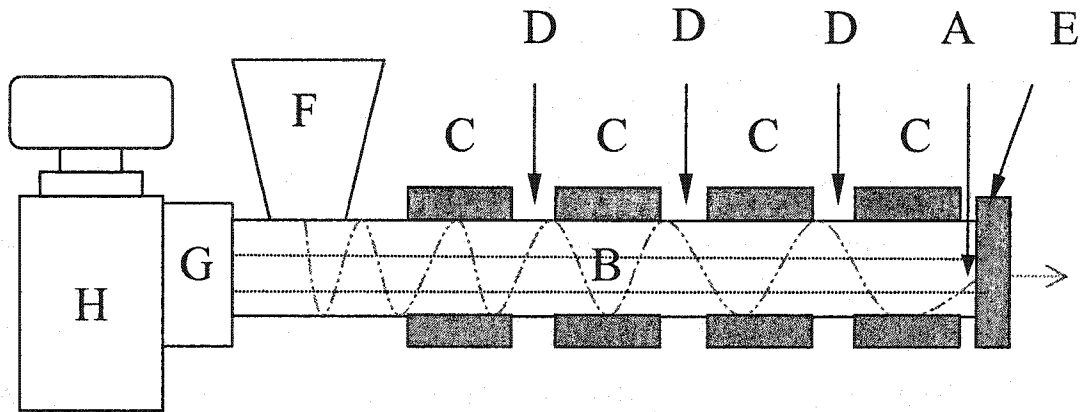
Schematic diagram of polymer extrusion. A: Screws. B: Barrel. C: Heater band. D: Sensors well. E: Exit die. F: Hopper. G: Main thrust bearing. H: Gear box.
